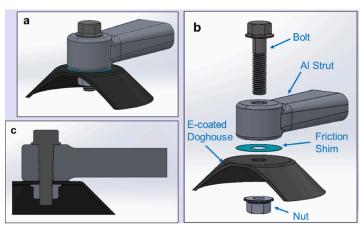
(a) CAD model view of the bolted connection between an aluminum strut and e-coated sheet steel "doghouse" used as the geometry for the simulation studies; (b) Exploded view of the same connection geometry with labeled components; (c) Cross-sectional view that is used in the simulation results.
